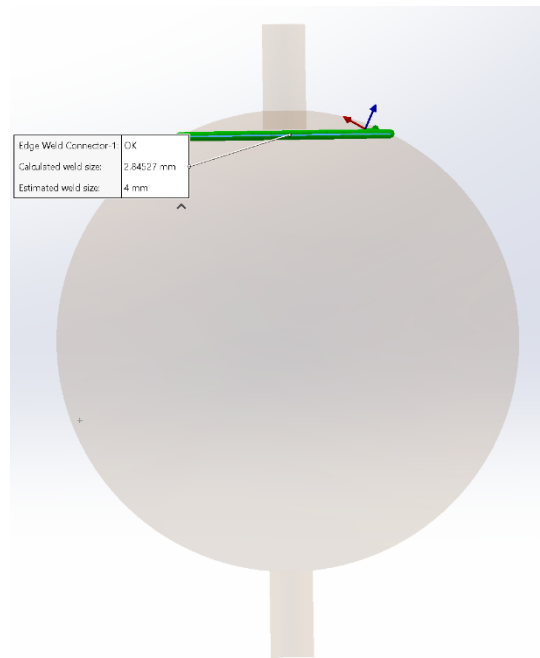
Part-Within-Part PV Weldment @ 885 PSI
